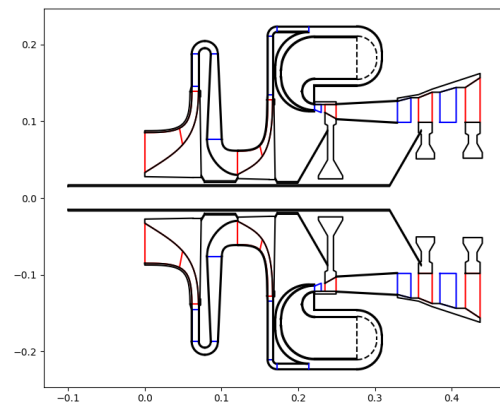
Mechanical design results of the MTR390-2C turboshaft engine with $OPR = 15$
